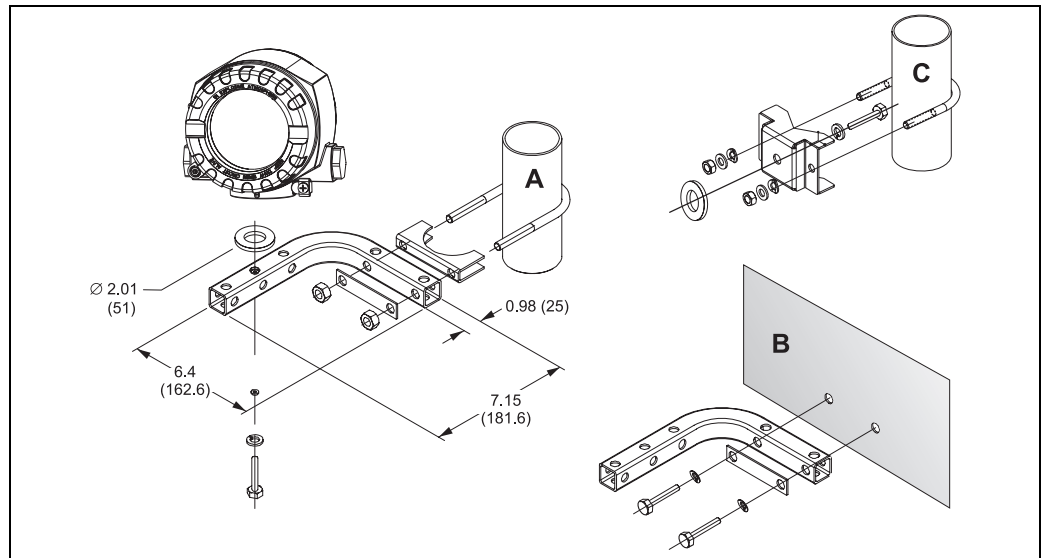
Installation of the field transmitter using the mounting kit, see chapter 'Accessories' (dimensions in inches; mm)
